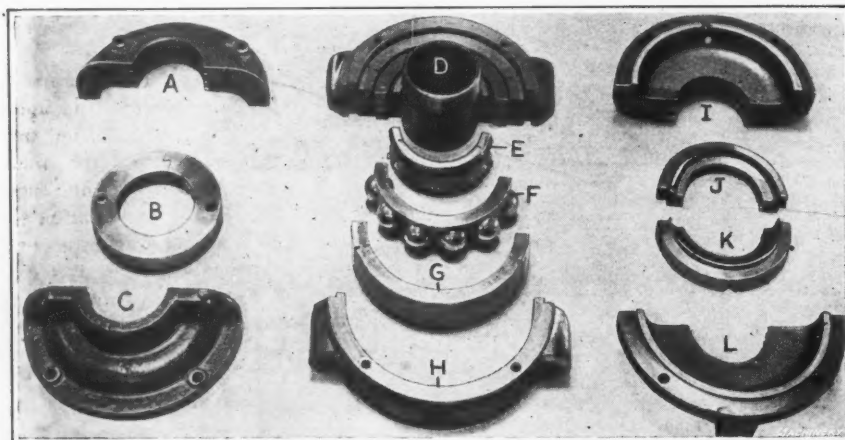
A-C, Upper and Lower Halves R. H. End Plate; B, R. H. Lock Nut; D, Upper Half Complete Bearing with Upper Cap and Shaft Adapter; E-G, Lower Half Inner and Outer Raceway; F, Lower Half Ball Cage; H, Lower Cap; I-L, Upper and Lower Halves L. H. End Plate; J-K, Upper and Lower Halves L. H. Nut Lock
